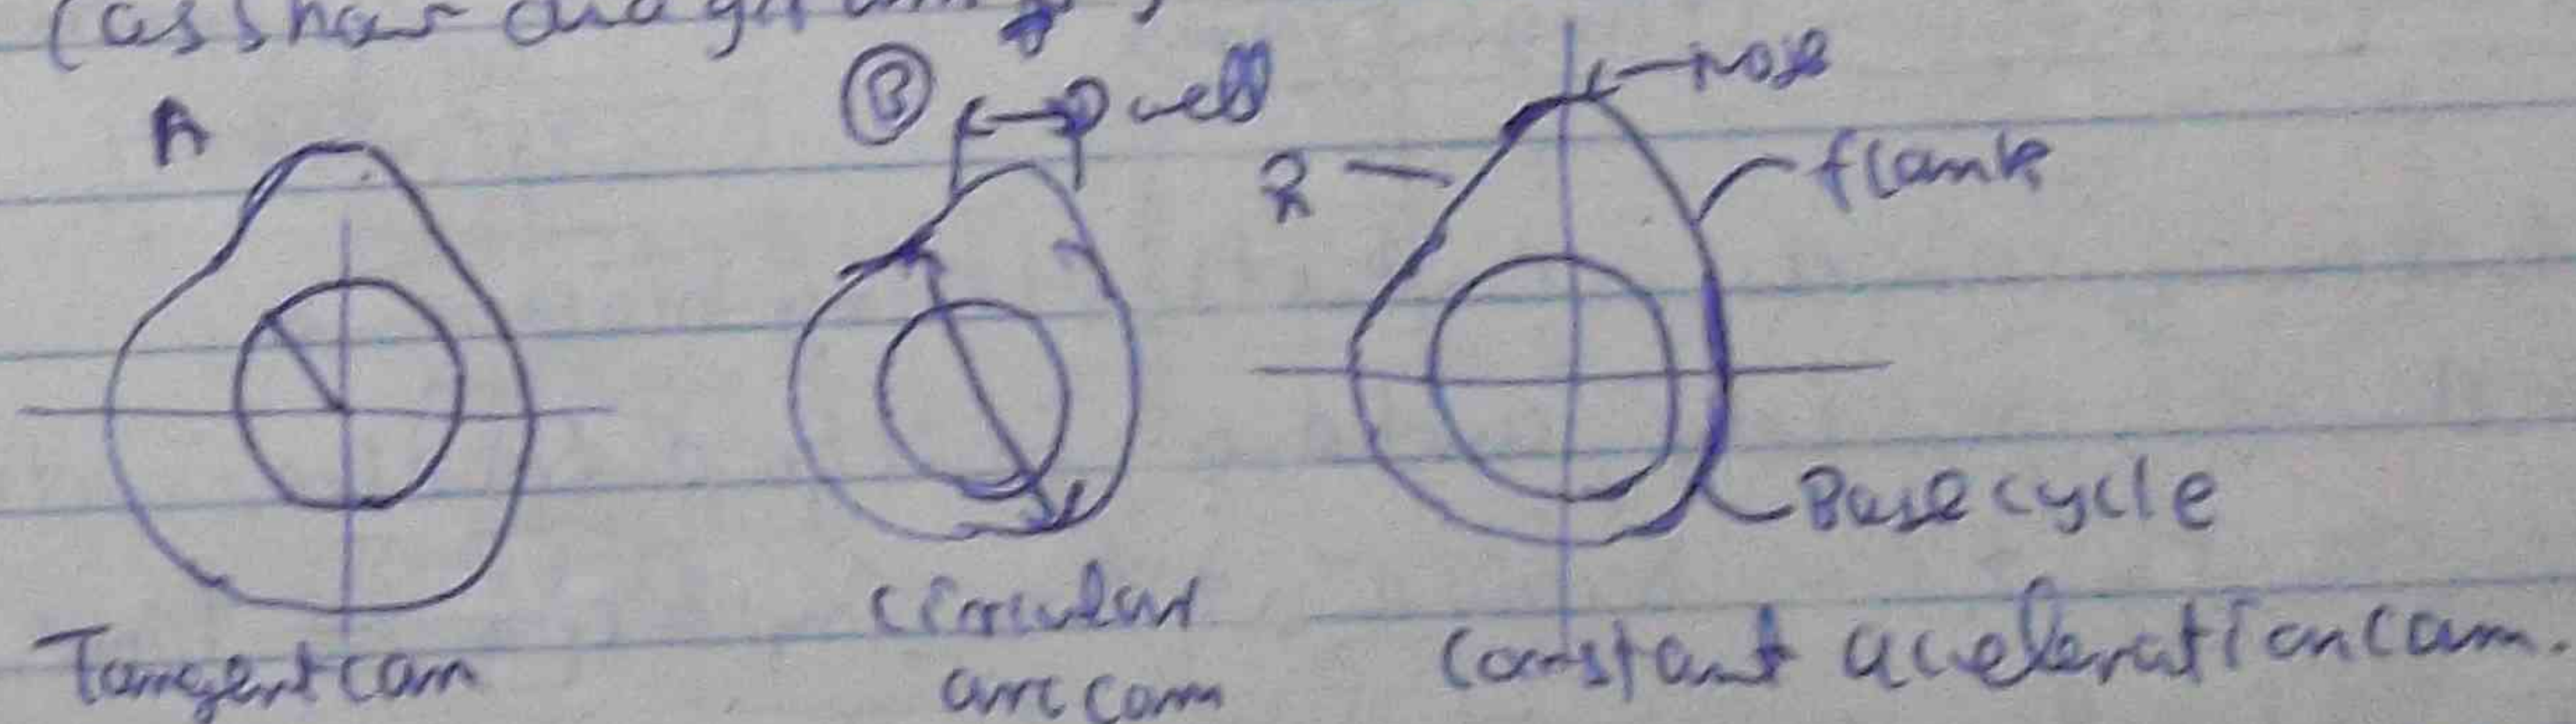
is outline diagrams showing the typical parts of valve driving devices
